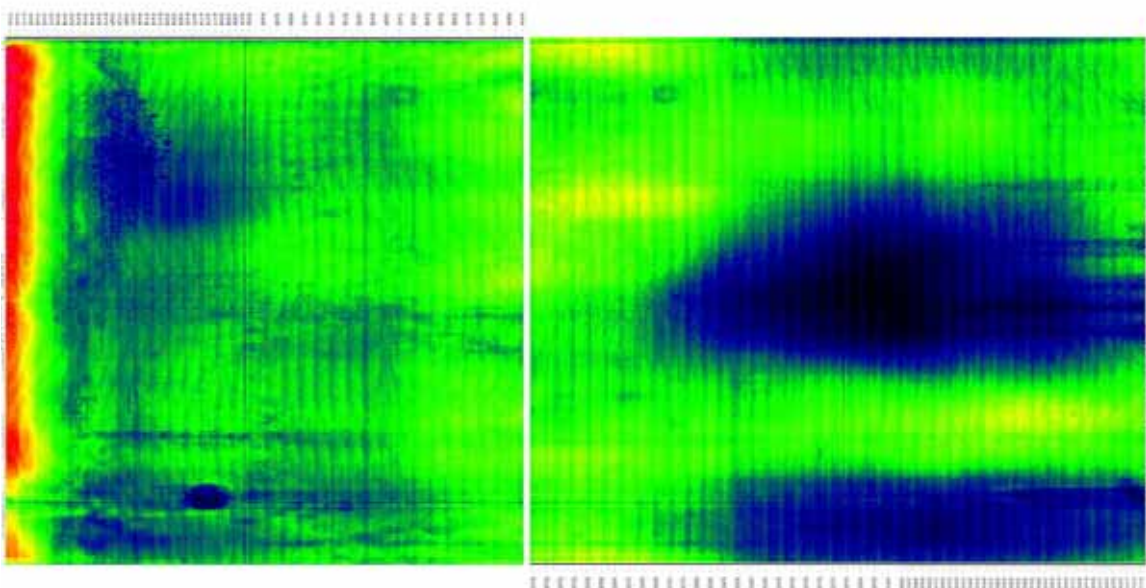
C-scan presentations of ultrasonic testing of the cylinders of the T55 tube after machining.
